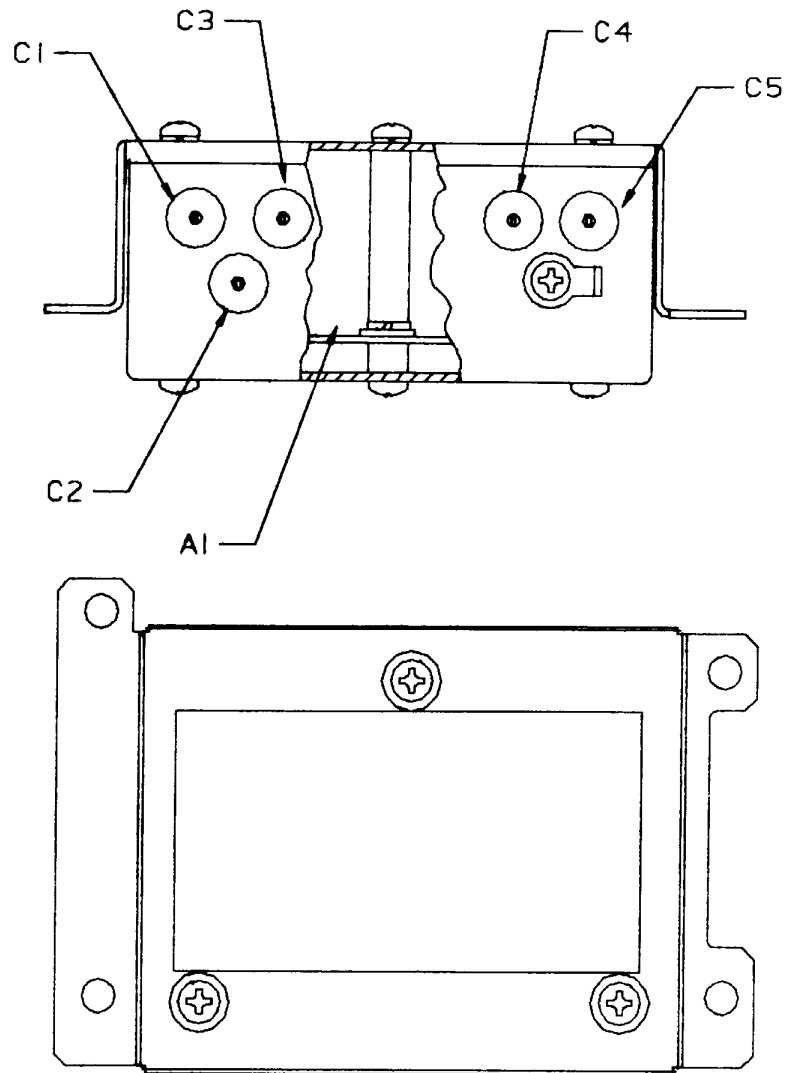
Front Panel Display Converter Assembly A13A6 Component Location Diagram (10073-2250 Rev. E)
